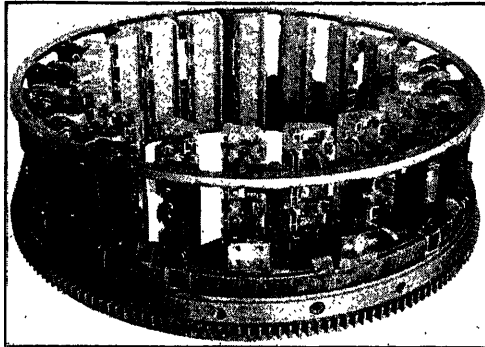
BRUSH-HOLDER YOKE FOR 1,250-Hp. TWIN ARMATURE, LOCOMOTIVE MOTOR
